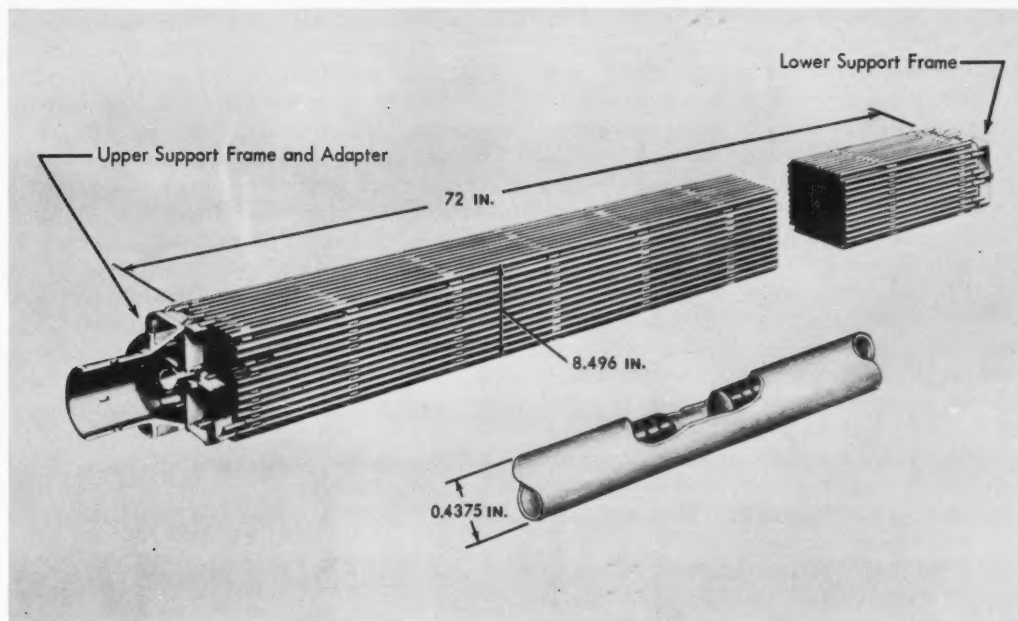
N.S. Savannah reactor fuel assembly.
